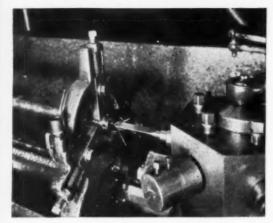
Close-up view of "Hardsteel" triangularshaped drill used to start hole in hardened end of Rolls-Royce camshaft.
